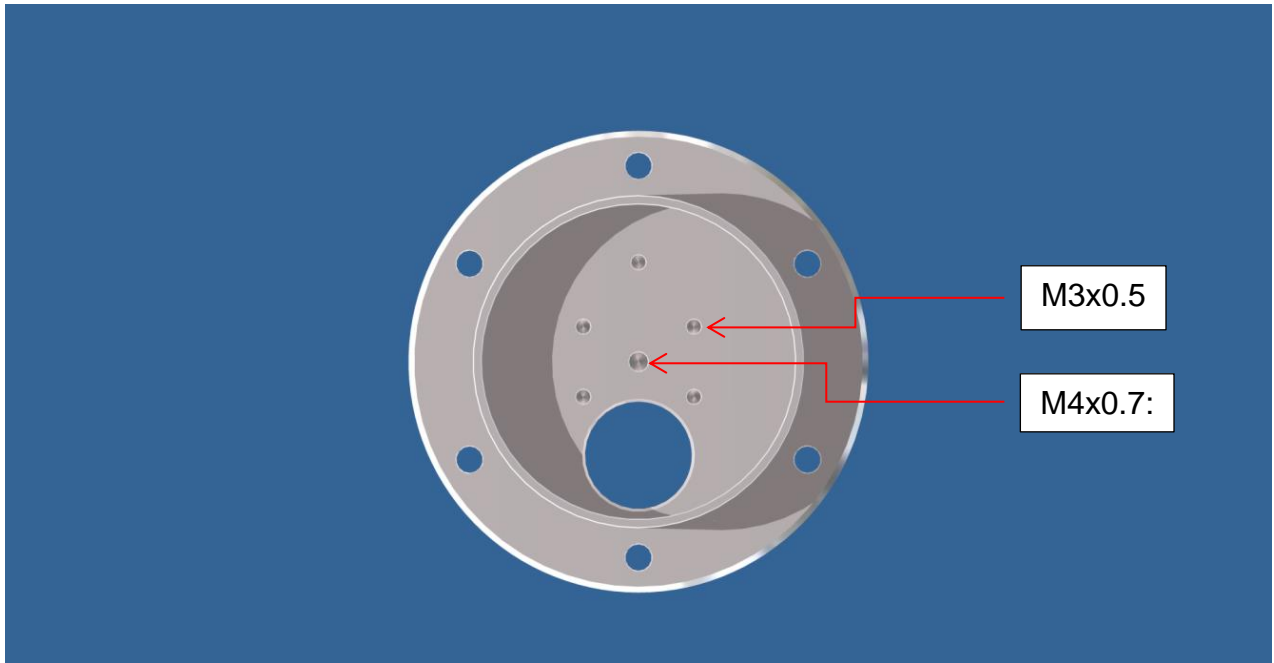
5: VA1.x.K1 Blind holes for mounting
